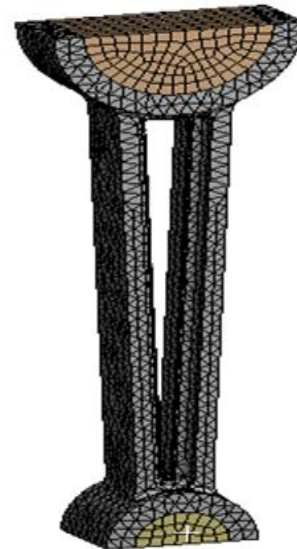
Meshing of Connecting Rod having Elliptical Hole
